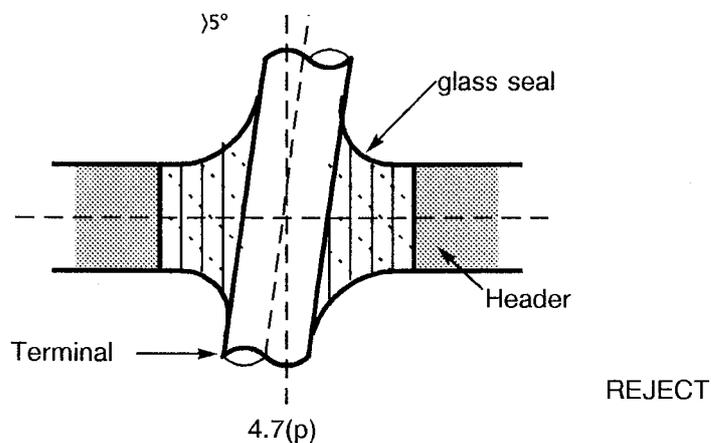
FIGURE X IX - LEAD POSITION WITHIN GLASS-TO-METAL SEAL
